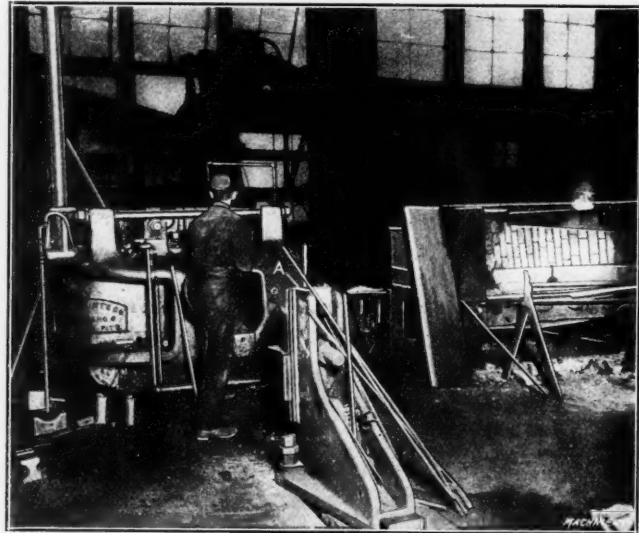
5-inch Ajax Forging Machine at Work in the Collinwood Shops of the L. S. & M. S. Railway, set up for making Coupler Pocket Filling Blocks for Freight Cars
